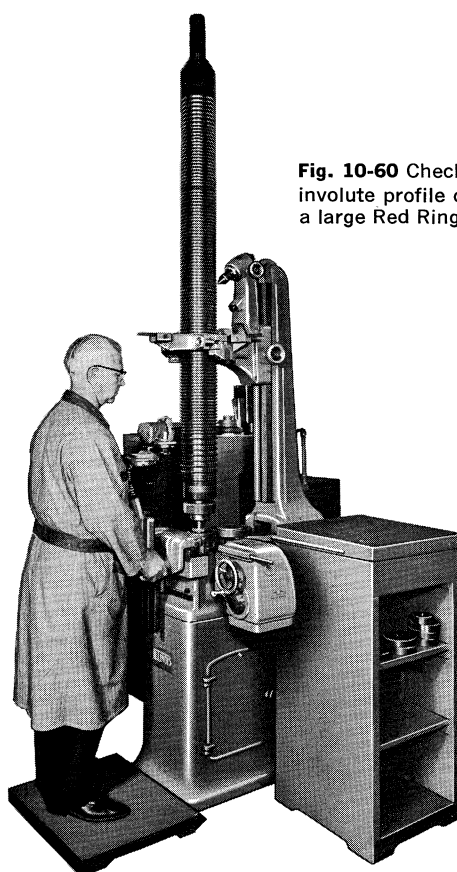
Checking involute profile on a large Red Ring broach.
